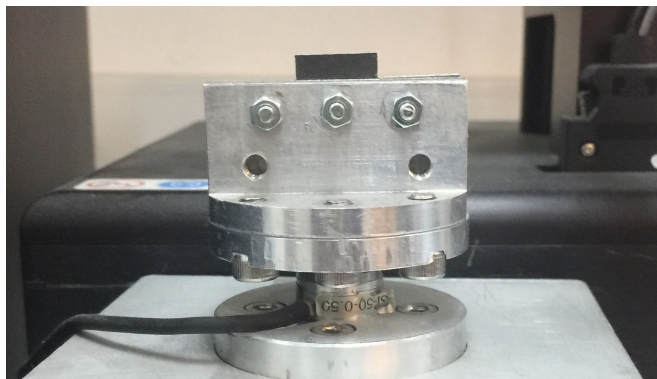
ATI FT07638 force/torque sensor(below) with the workpiece fixture(above) calibration SI-50-0.50
